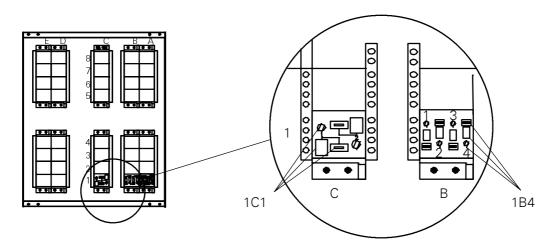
/4 Connecting Plugs on Installation Housing (Back View), Device Version 7SA519
